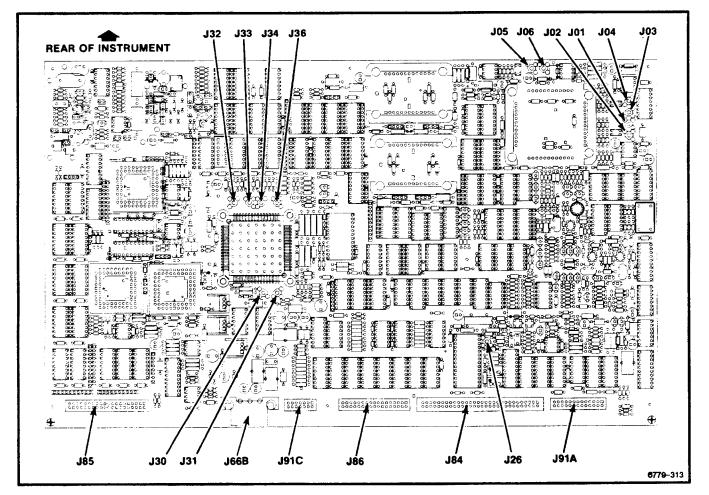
Connector locations for removal of the A5 Acquisition board.
